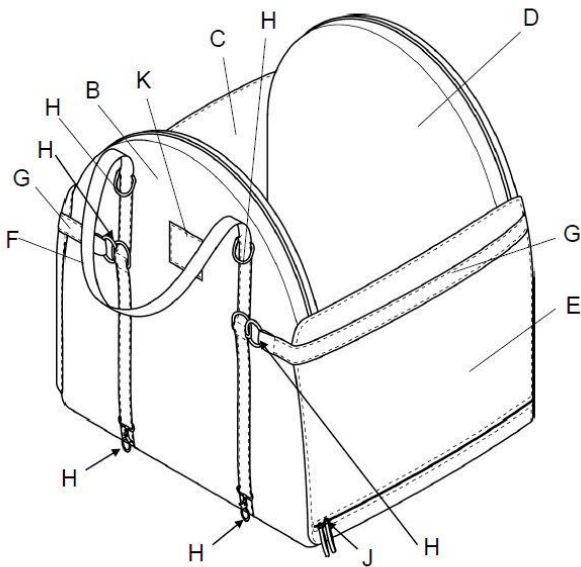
THREE-DIMENSIONAL VIEW – CLOSED CONDITION
